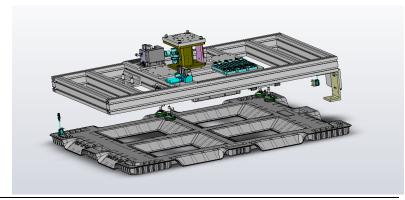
An illustration of the Tray Handling Robot end of arm tooling.
